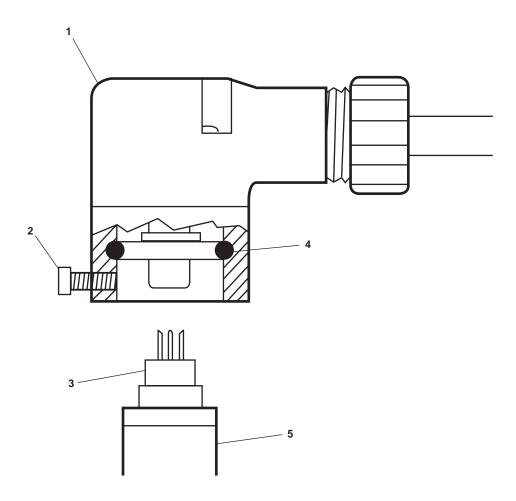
Cable Assembly Adapter and TLI Transmitter Connector (Typical)
